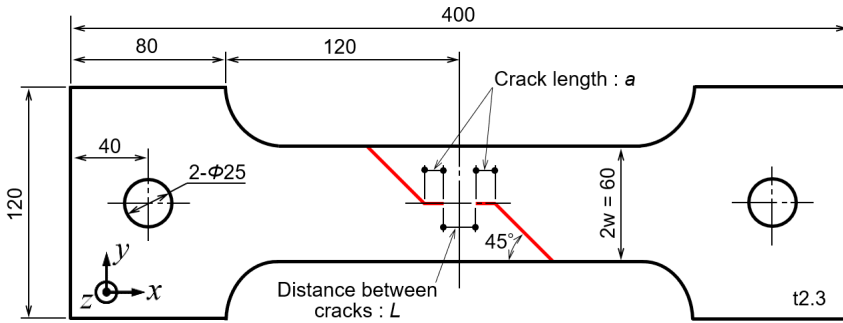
Dimension and geometry of tensile shear plate specimen with the artificial cracks
